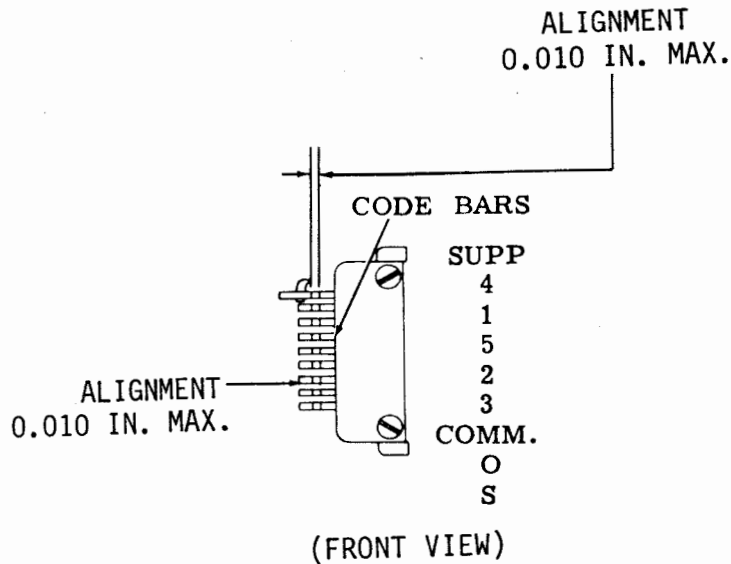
Code Bar Shift Mechanism, Condition Code (Zero) Code Bar Shift Mechanism, and Off-Line Shift Solenoid Bracket Assembly
